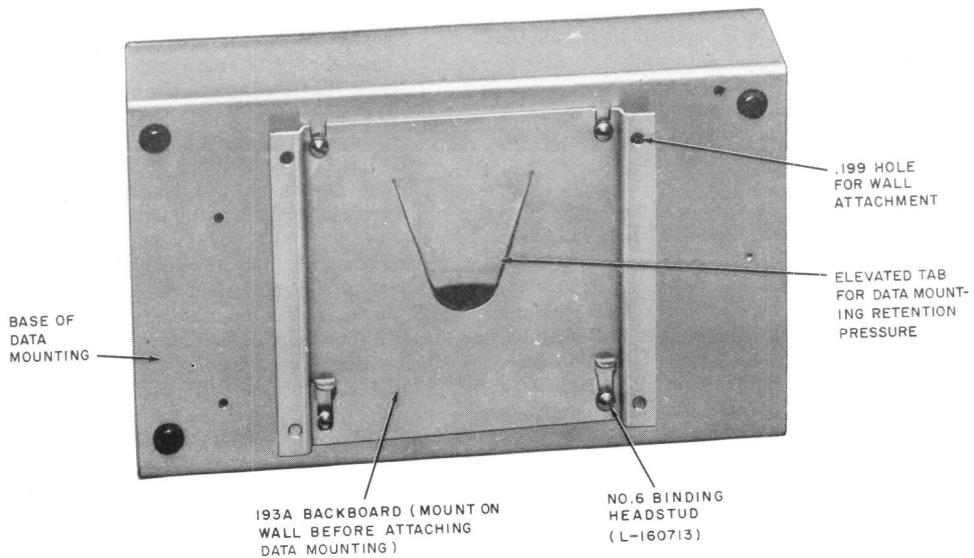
44A-Type, 45A1, 59A1, or 62A1 Data Mounting Installed on 193A Backboard
